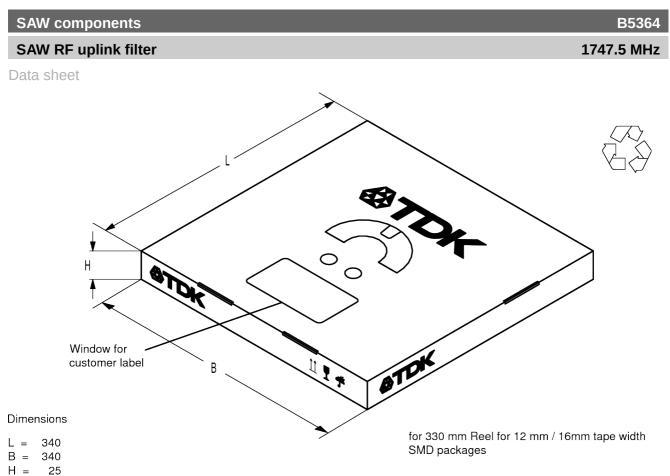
Drawing of folding box for reel with diameter of 330 mm.
